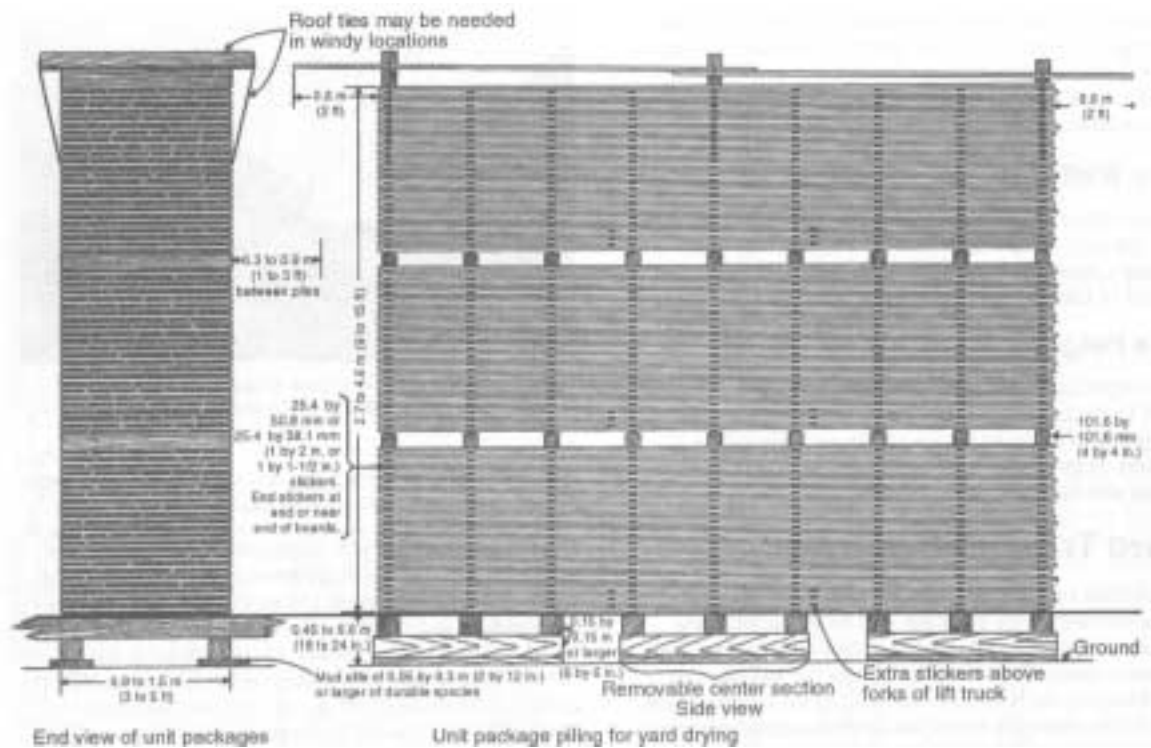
Properly piled lumber packages illustrating: 1) proper foundation construction and alignment, 2) proper sticker alignment, 3) extra stickers used for support above forklift lifting points, 4) roof overhang, slope, and tie-downs. (Source: *Air Drying of Lumber, USDA FPL-GTR-117*)
